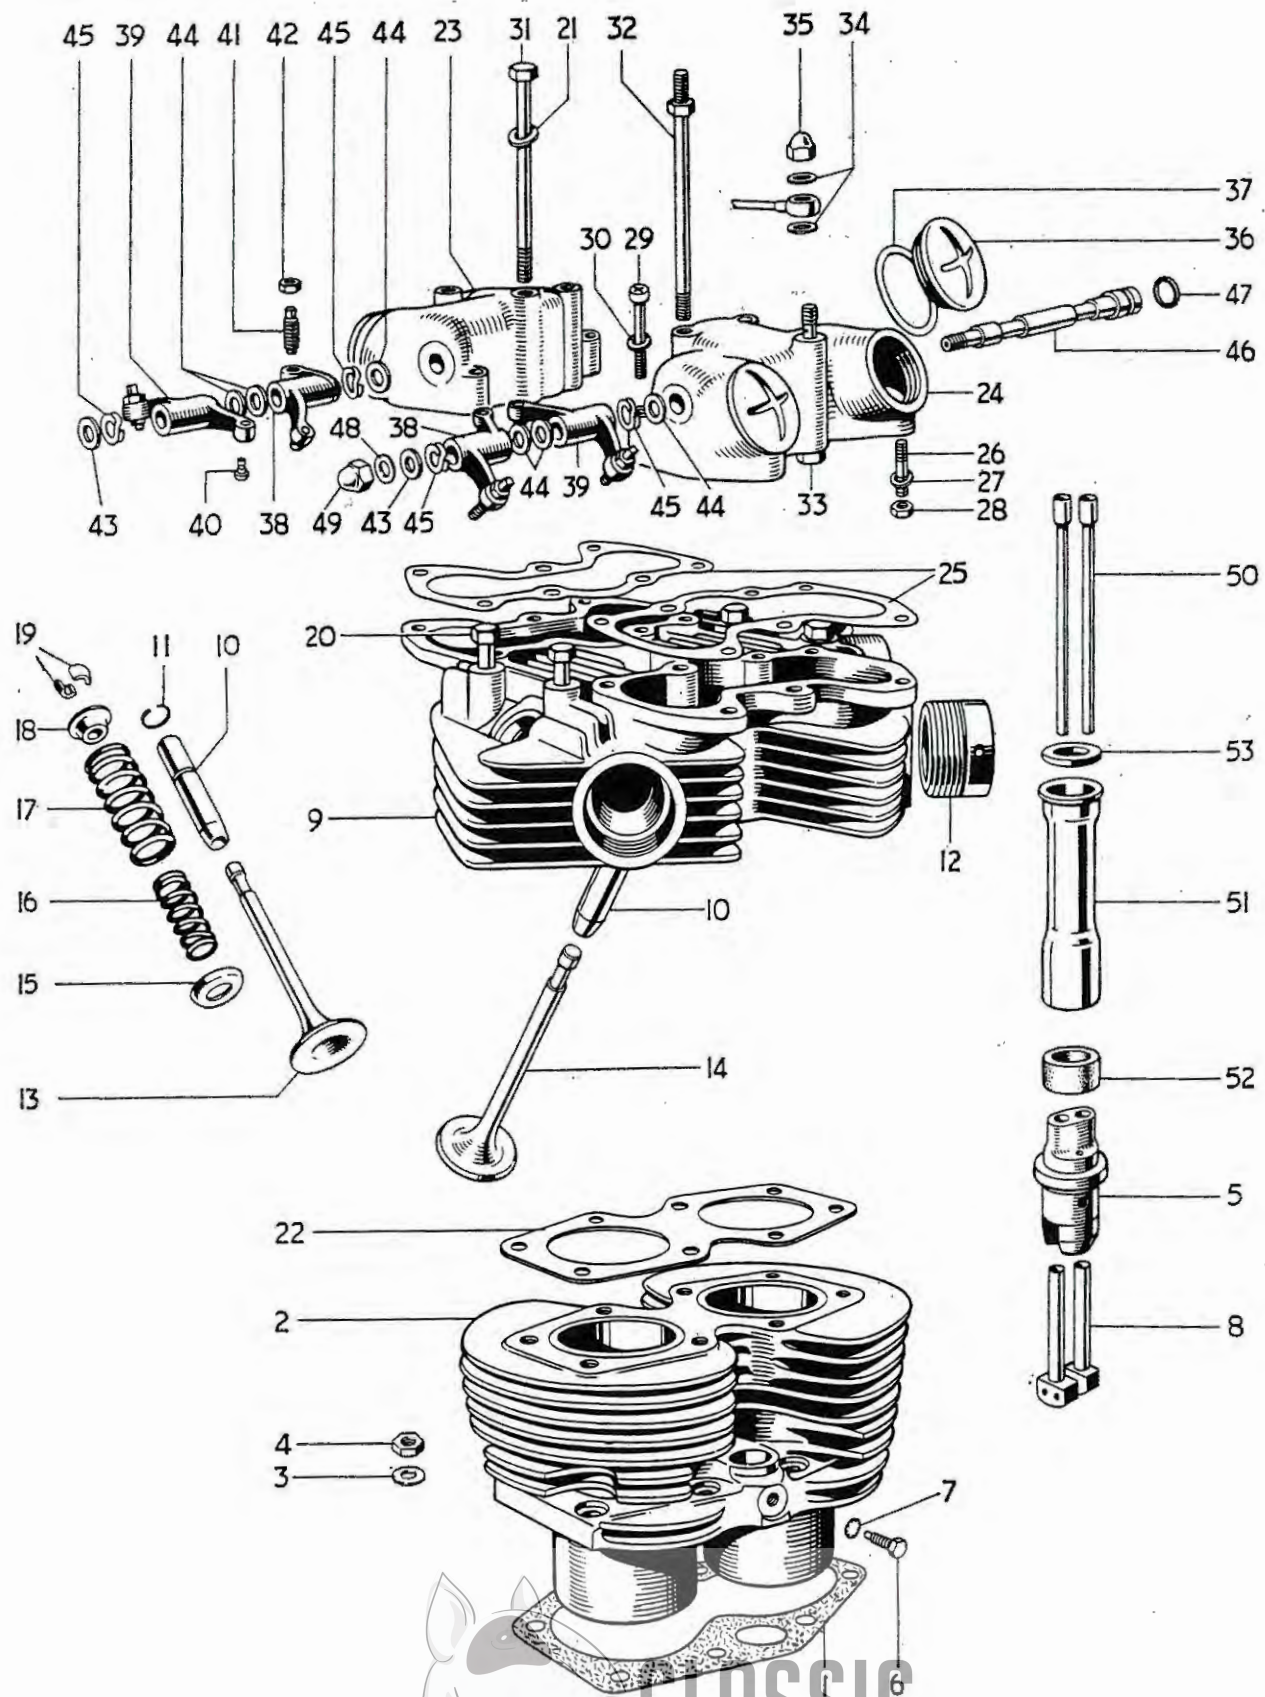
CYLINDER BLOCK AND HEAD, 5TA & T100A
